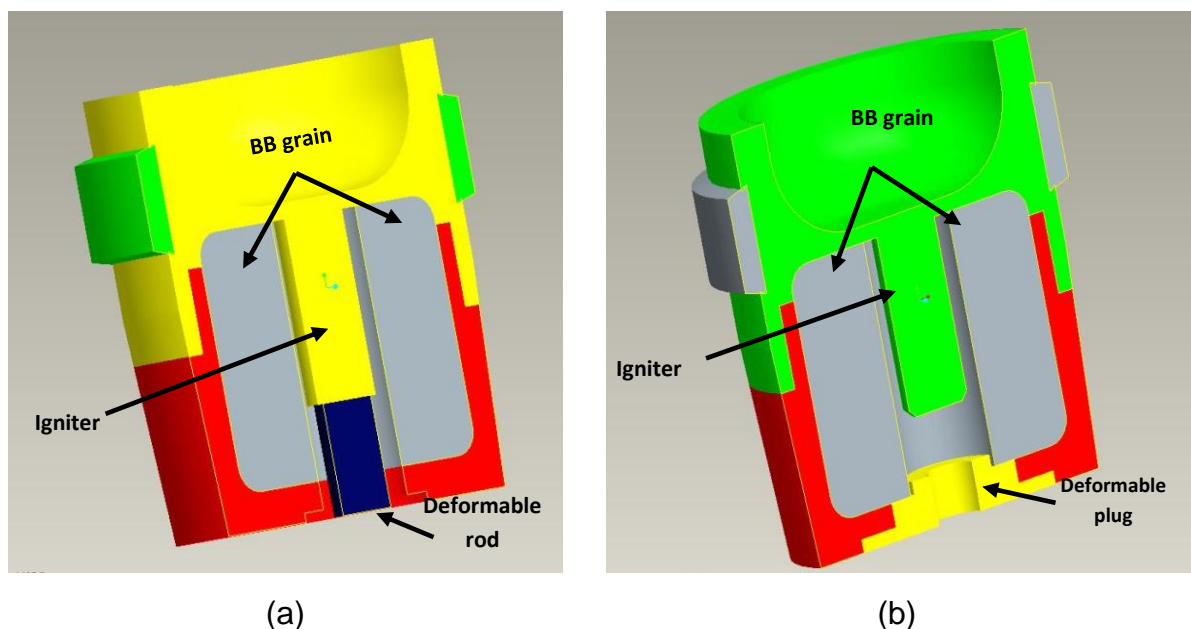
Schematic drawing of base bleed unit provided with deformable rod/ plug exit
